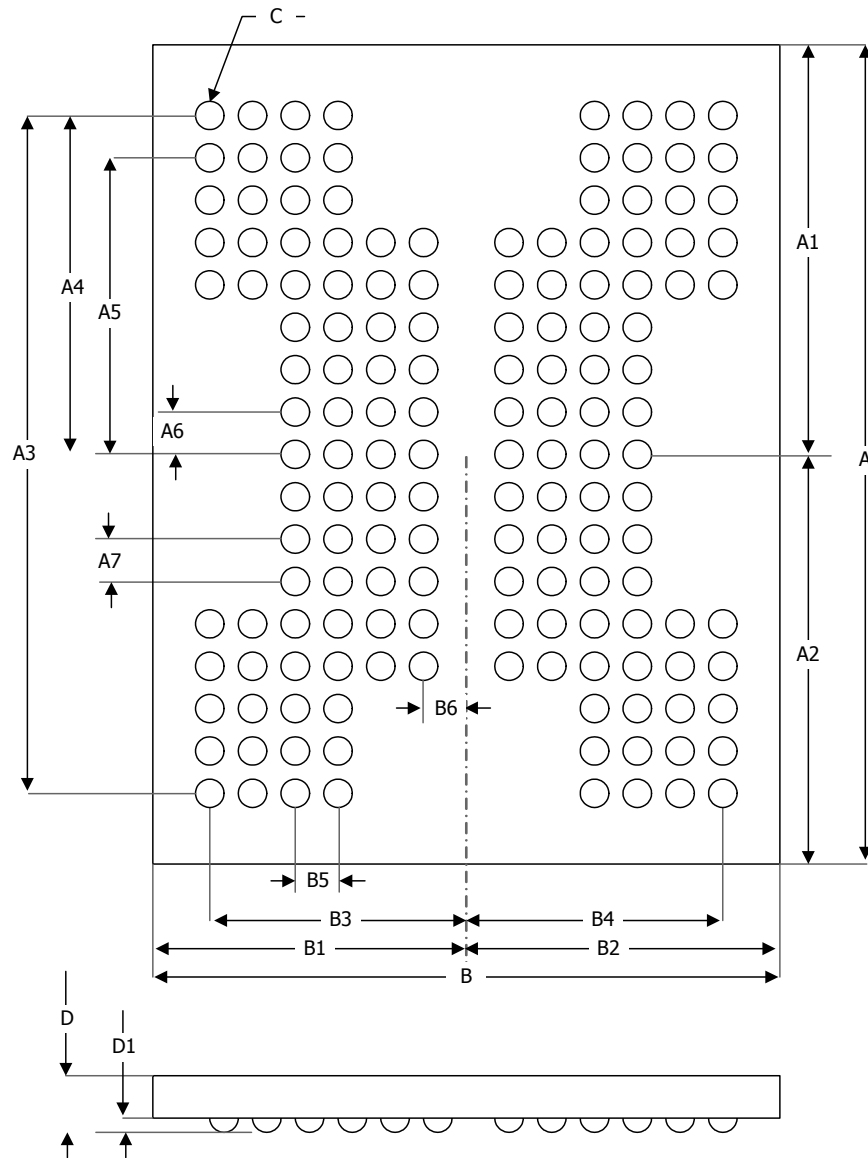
defines the ball spacing requirements for the 152-ball BGA package. The solder ball diameter is 0.55mm post reflow. The 152-ball BGA has one package size : 14mm x 18mm.
